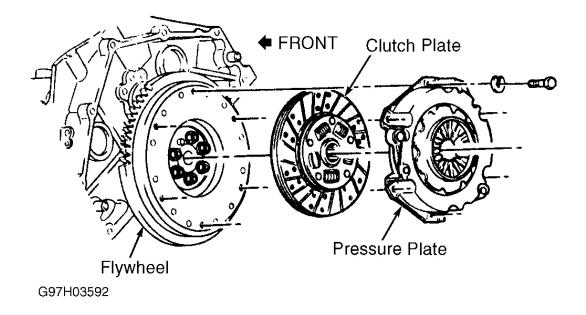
Exploded View Of Clutch Assembly Courtesy of GENERAL MOTORS CORP.
